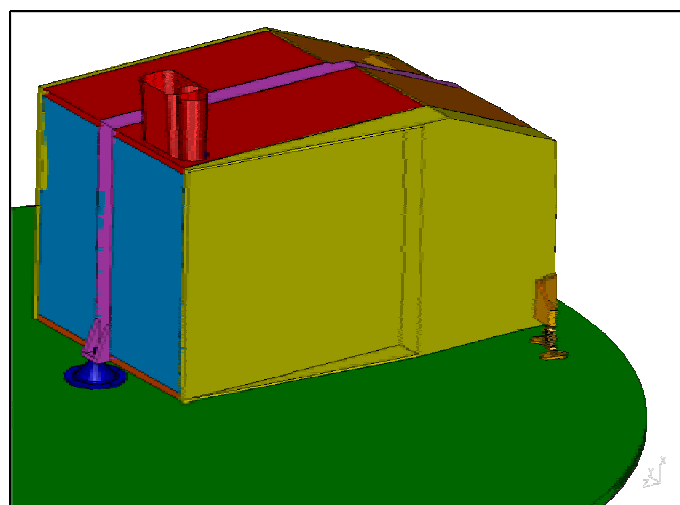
View of the outside of the instrument – Common Structure + Mounting
